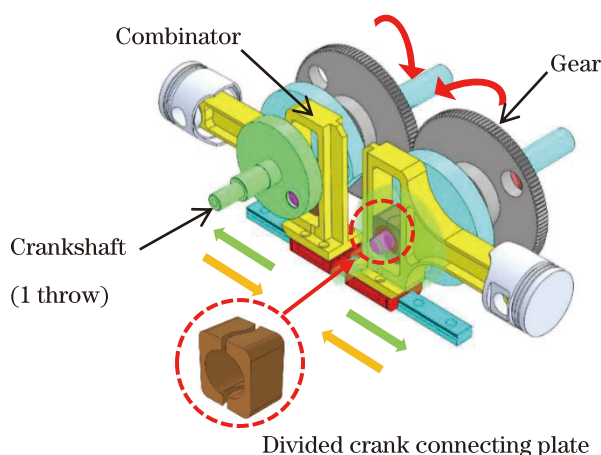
Internal mechanism of XY separate crank mechanism multiple cylinder engine[5].
